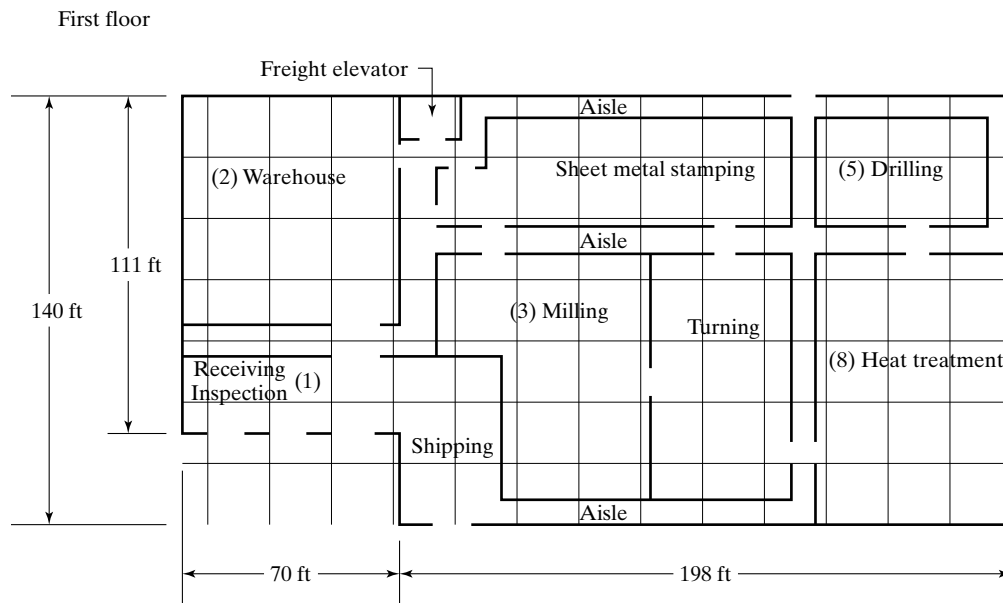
(b) Exhibits for Problem 10: first floor layout of the factory building
